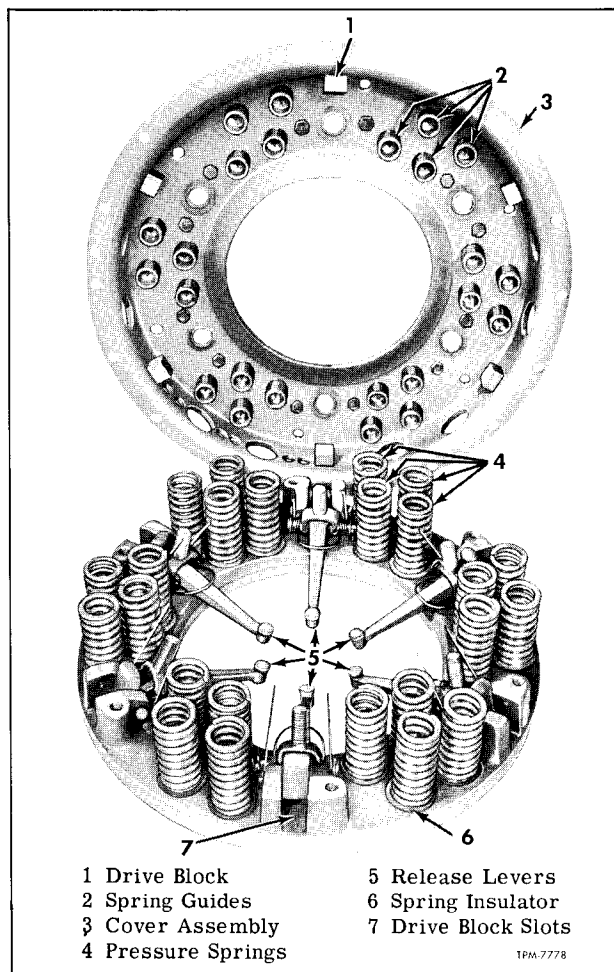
Springs and Levers in Position For Installing Cover Assembly
